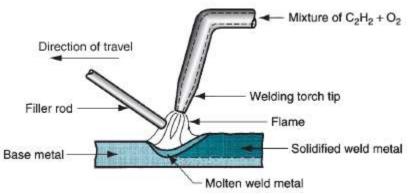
A typical oxyacetylene welding operation (OAW).
